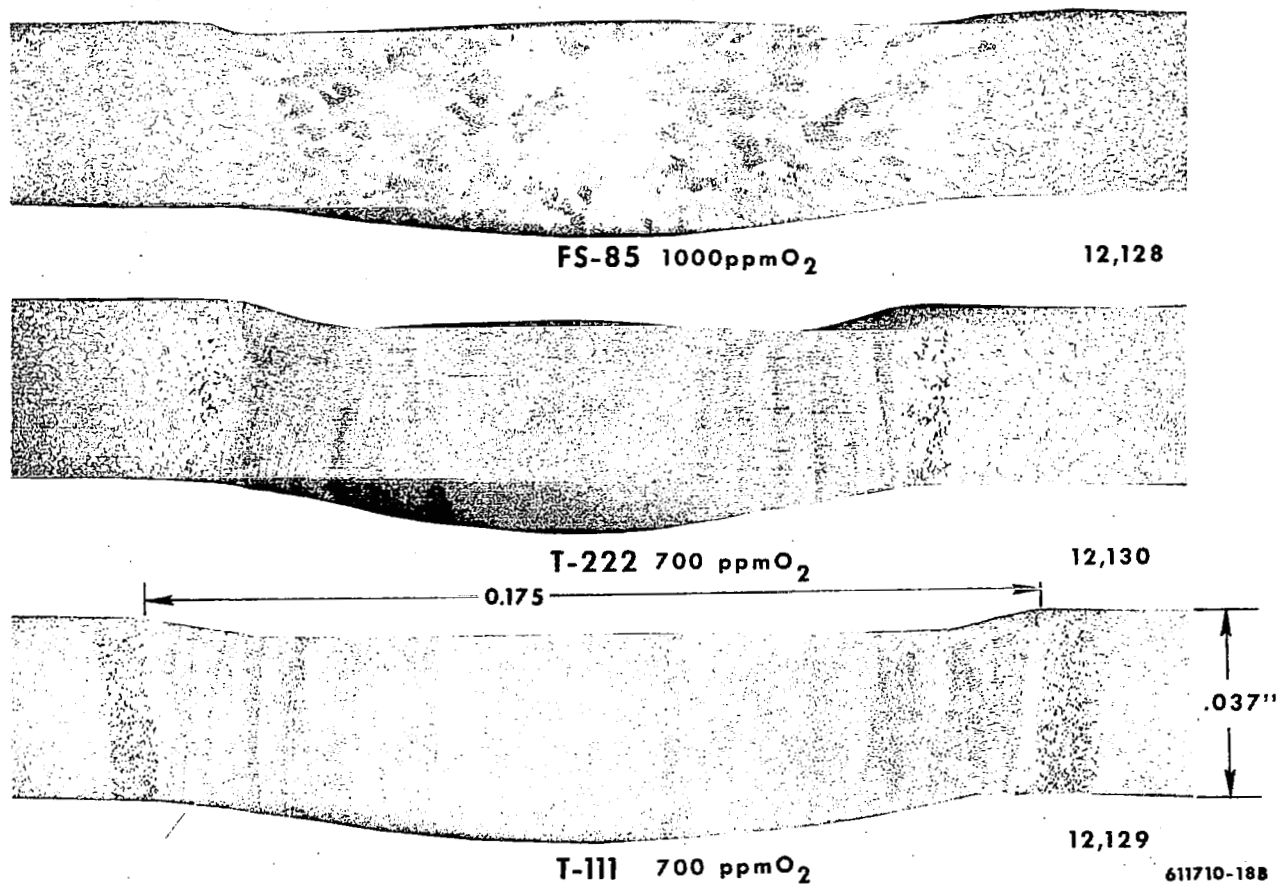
High Oxygen Content Weld Transverse Sections
